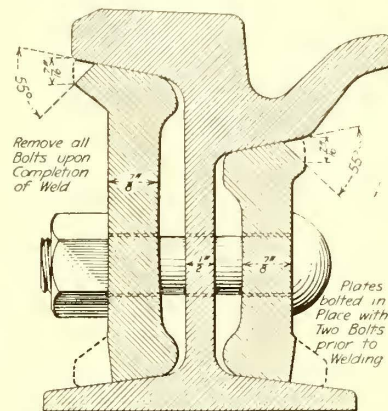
CROSS-SECTION JOINT READY FOR ARC WELDING
